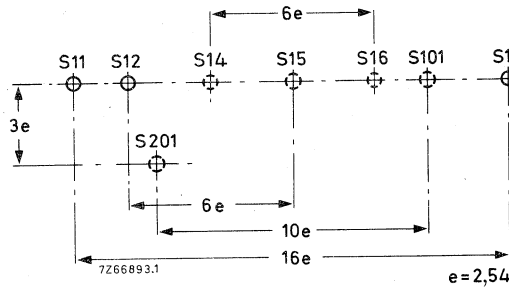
Hole pattern of the printed-wiring board for a single potentiometer (viewed on component side).
